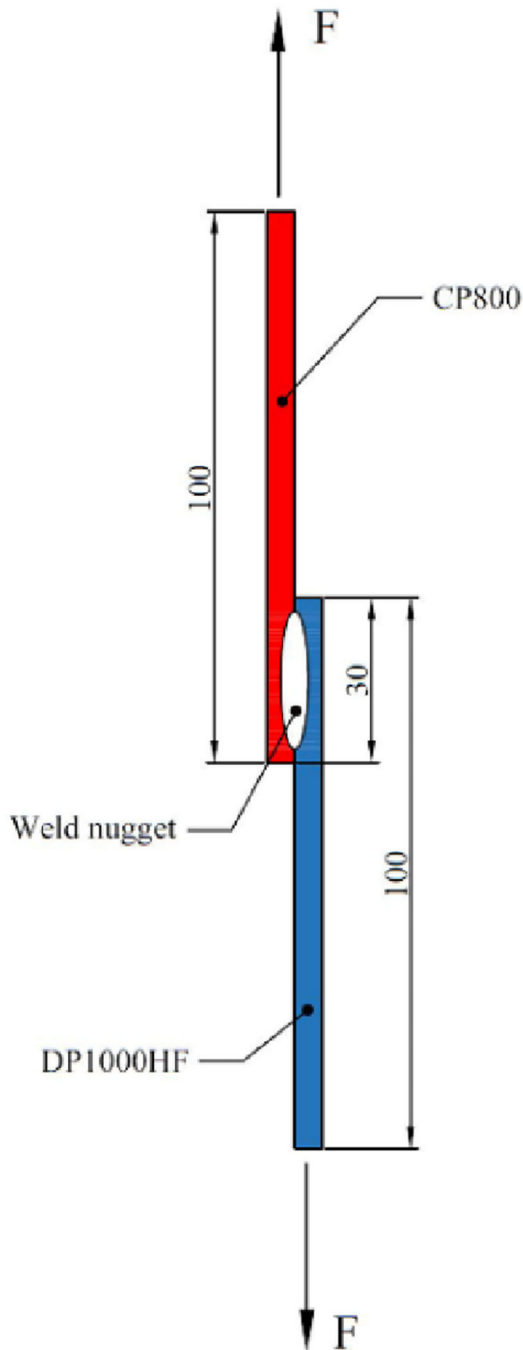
Dimensional details of the RSW applied tensile-shear test specimen.
